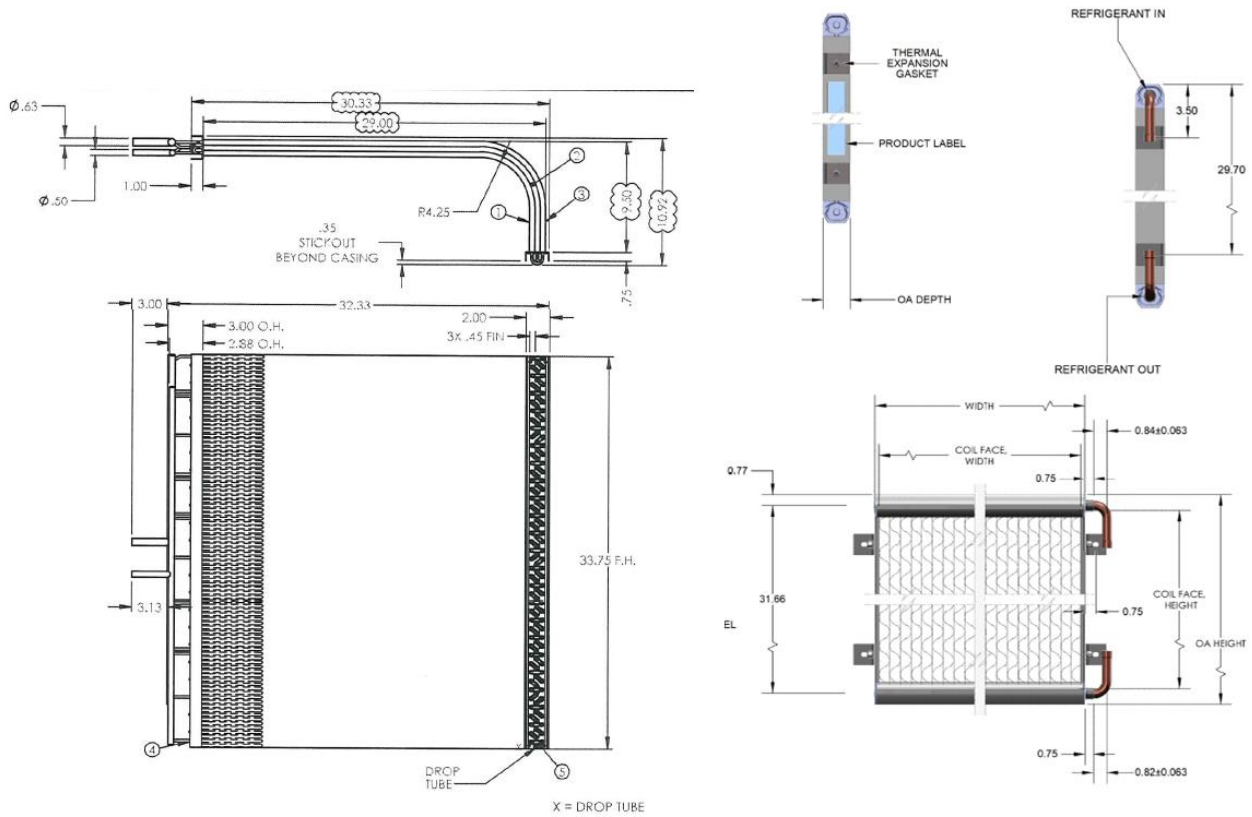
HX FORM EXAMPLES: L-SHAPE (LEFT), FLAT (RIGHT).
